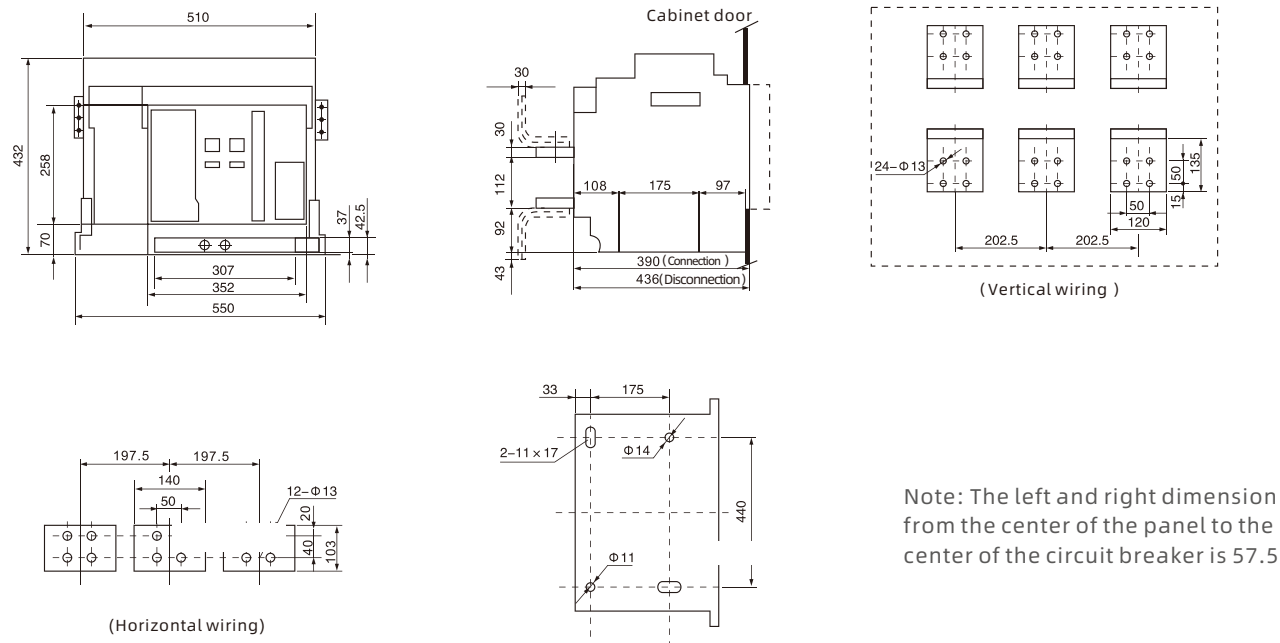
Draw-out circuit breaker overall and installation dimensions (ARW1-4000)
